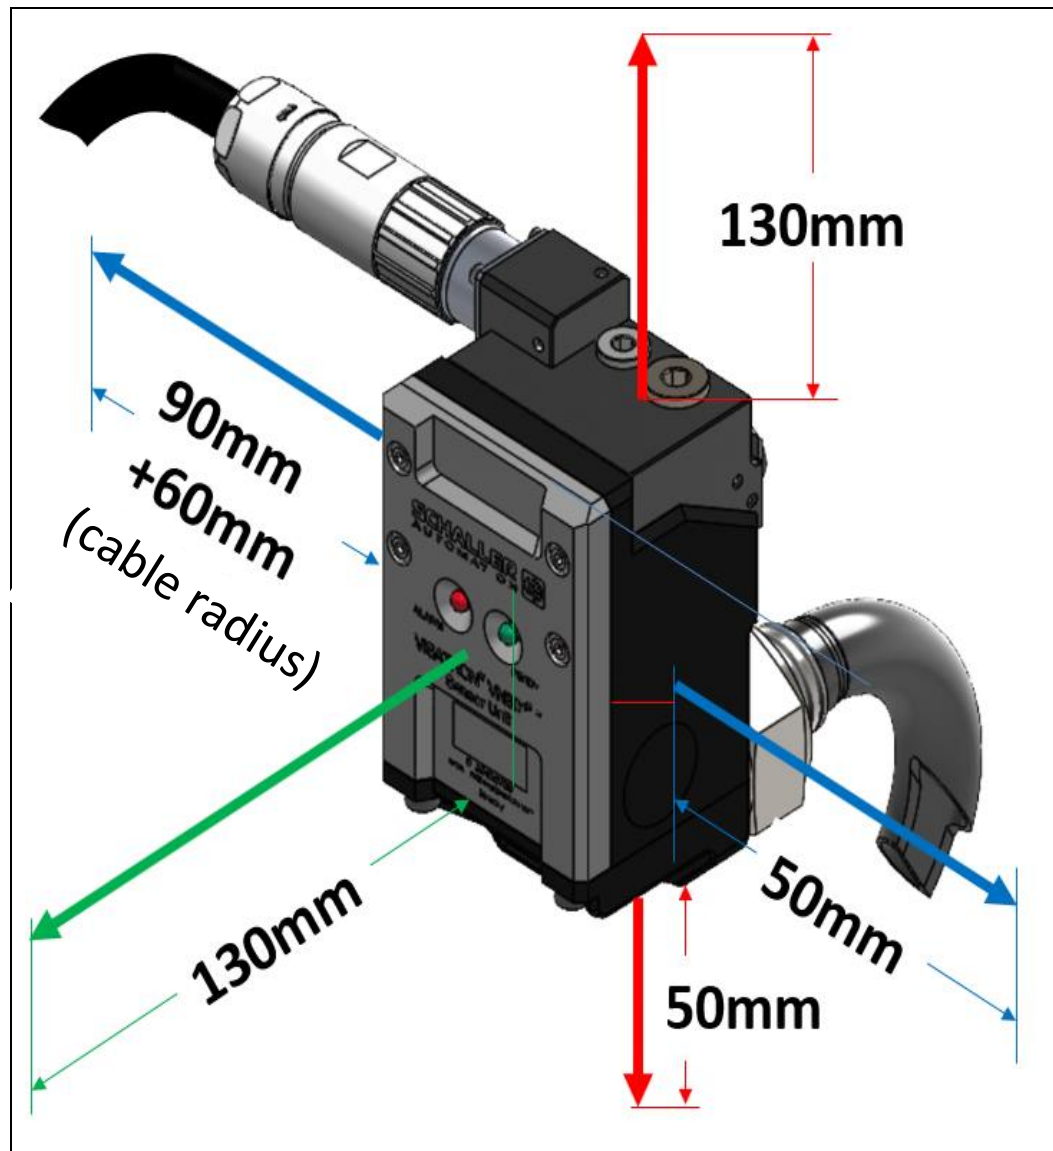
Installation space and dimensions for the “Left” VN301^{plus} sensor unit
